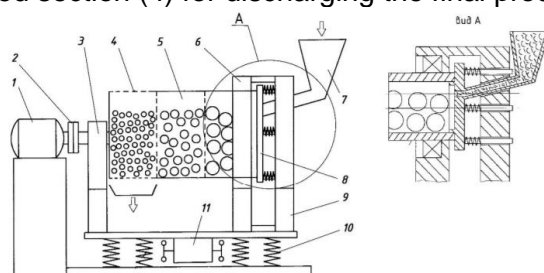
Vibratory-rotary mill of Tambov State Technical University
